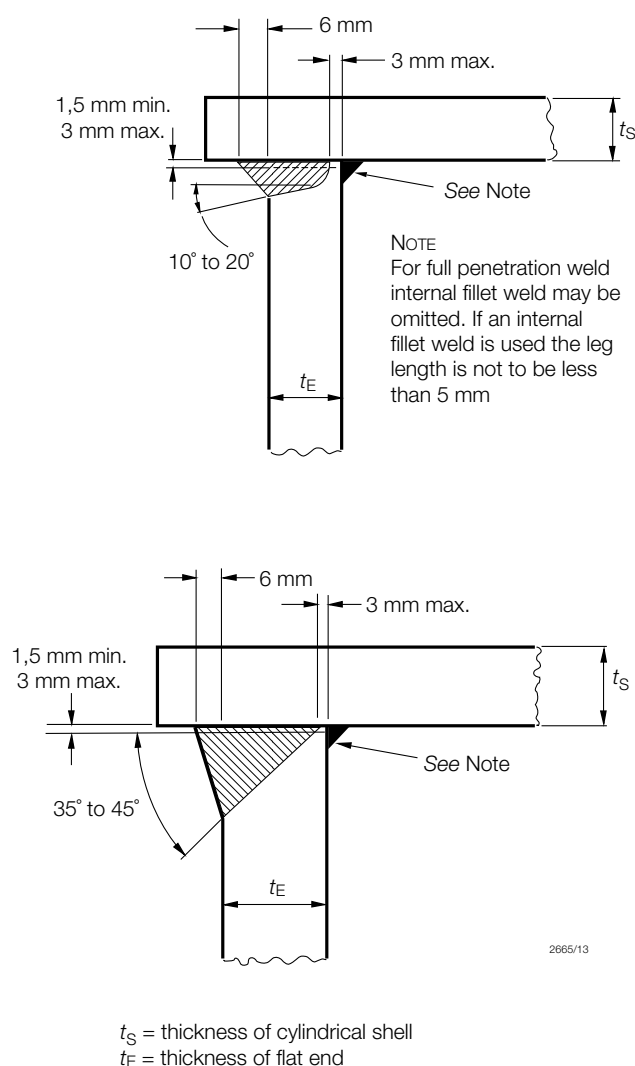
Typical attachment of unflanged flat end plates to shell
